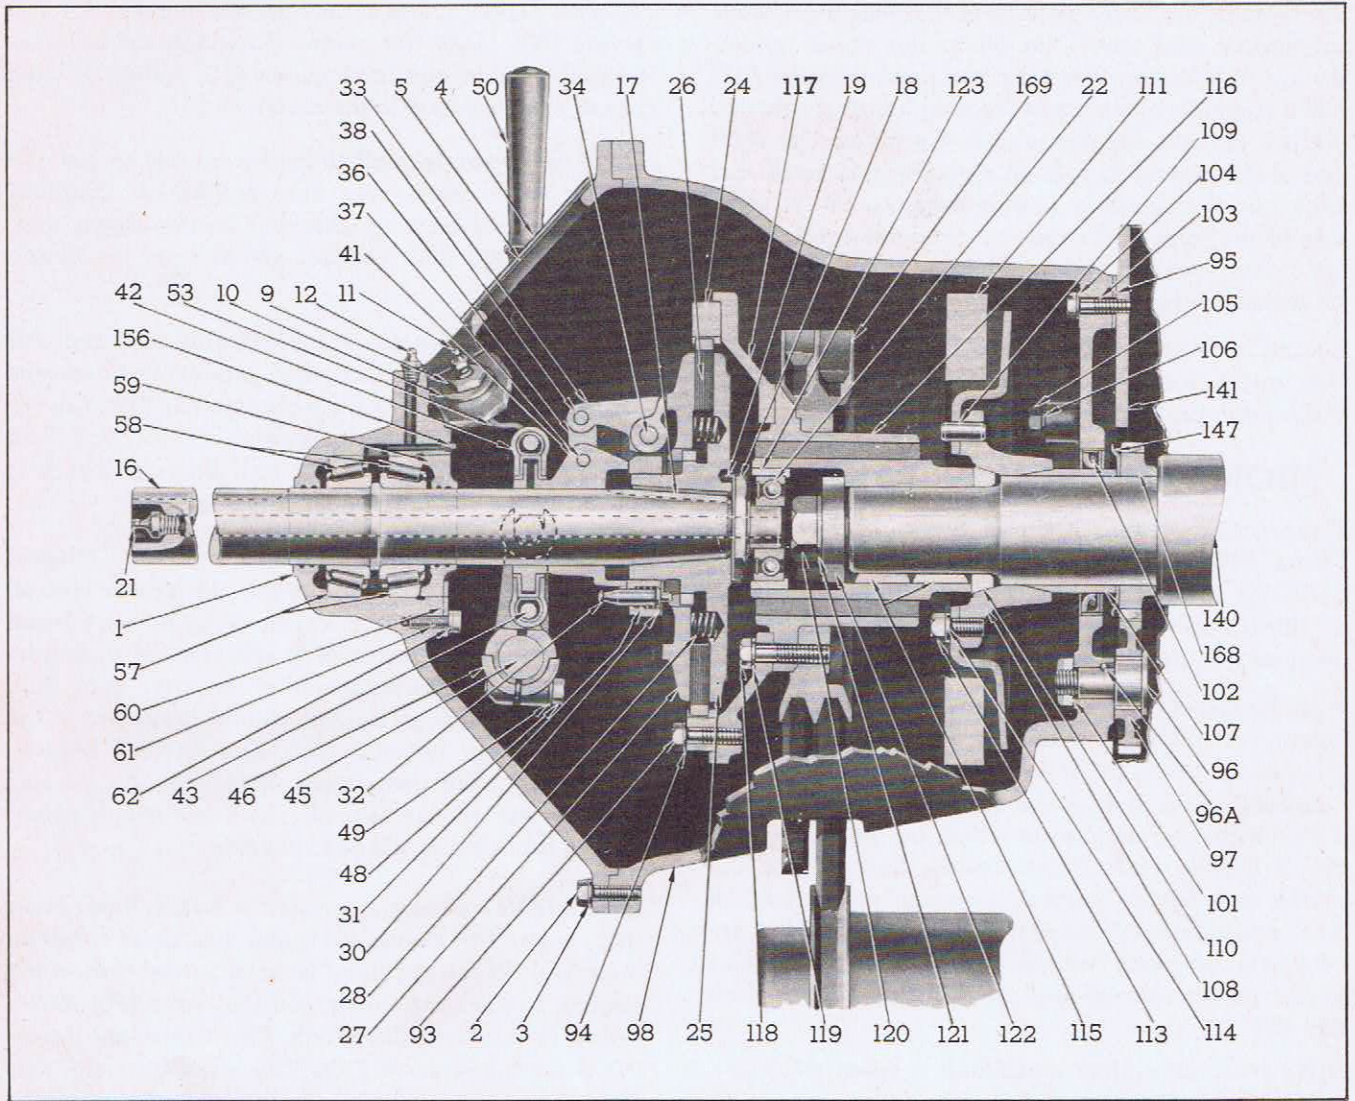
DIRECT DRIVE FRONT END POWER TAKE-OFF ASSEMBLY—MODEL 5168191.
